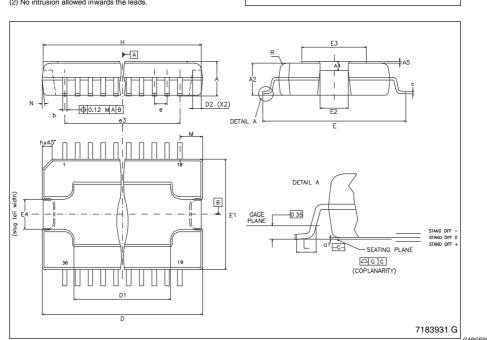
PowerSO36 (slug up) mechanical data and package dimensions
